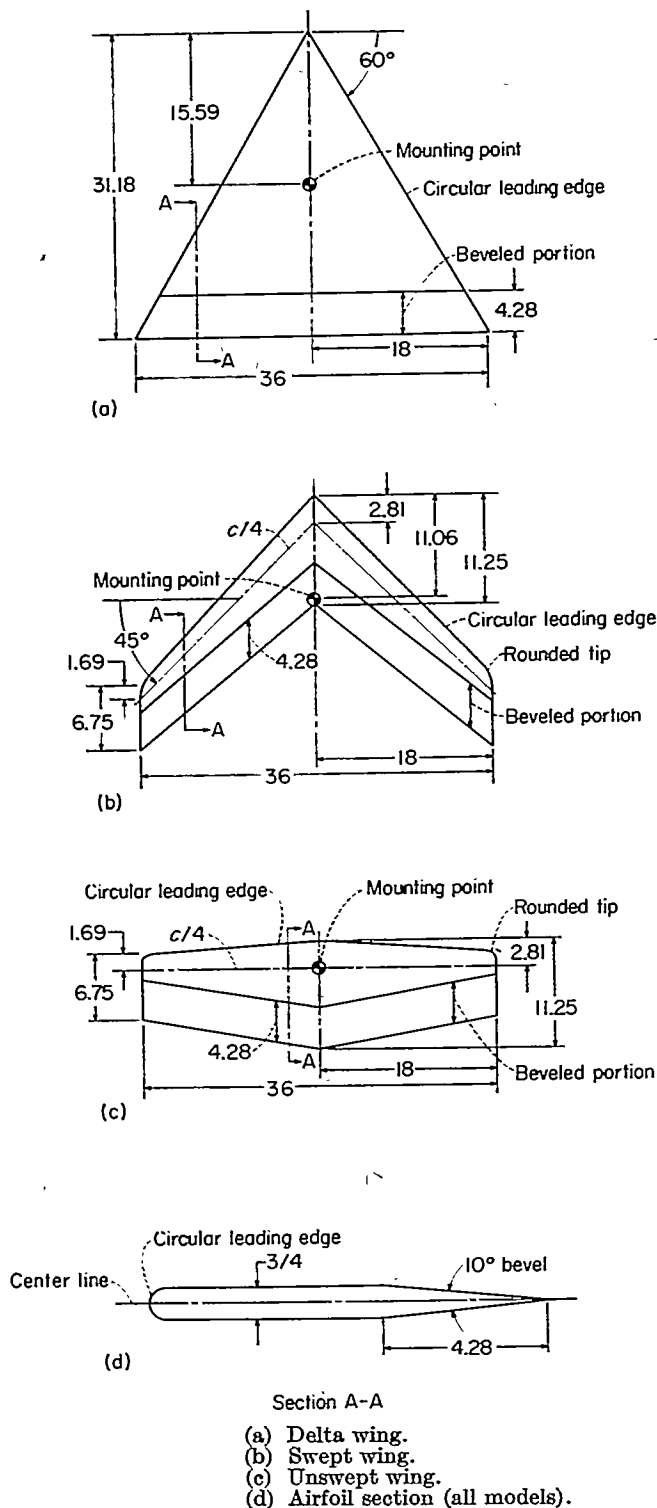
Sketches of the three wing models investigated. All dimensions are in inches.
